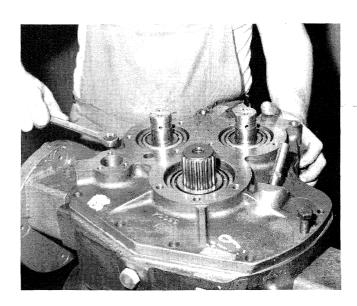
Using Pusher Screws to remove Rear Cover.
